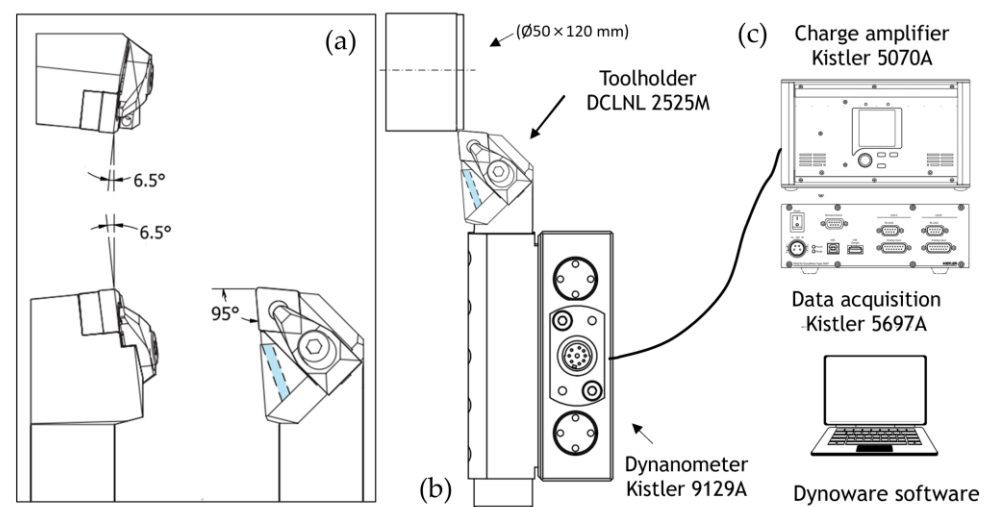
Instrumented setup of the longitudinal, cylindrical turning machining operations: (a) tool holder and effective rake, clearance, and cutting-edge angles; (b) cutting tool and tool holder relative to the position of the workpiece and load cell mount; (c) charge amplifier and data acquisition system.
